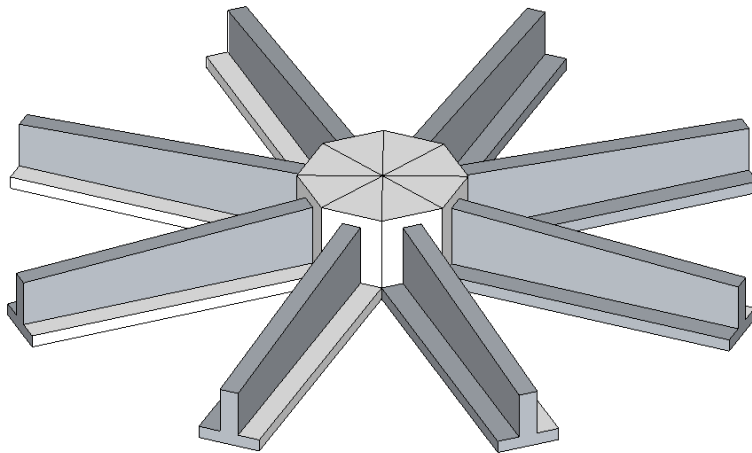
Concept with eight legs and bottom flange after assembling.
